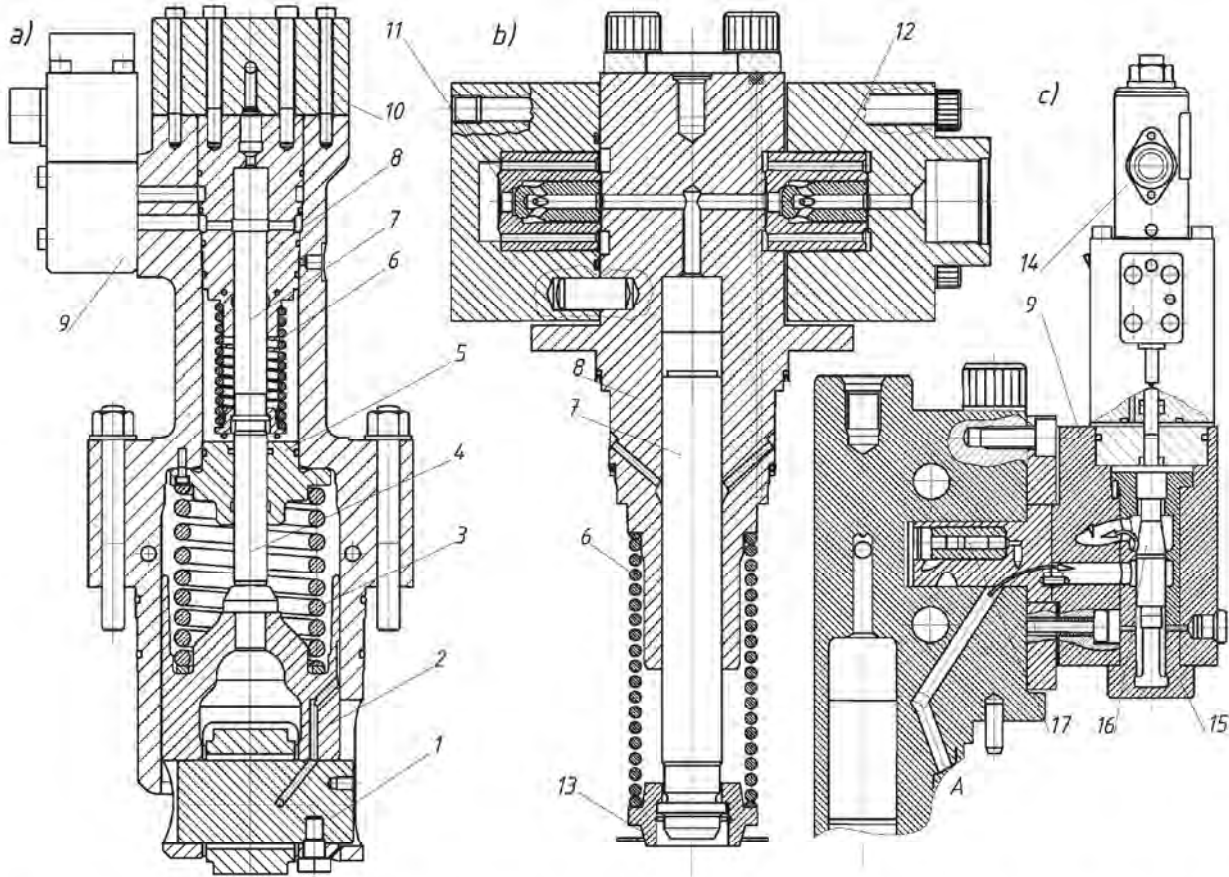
High pressure fuel pump of the 32 series engine from Wärtsilä (a), pump section of the fuel pump (b) and throttle valve for controlling the fuel supply of 46 series engines from Wärtsilä (c): 1 – roller pusher axis; 2 – pusher; 3 – pusher return spring; 4 – pusher rod; 5 – dividing diaphragm with pusher rod guide; 6 – plunger return spring; 7 – plunger; 8 – plunger bushing; 9 – flow control throttle valve; 10 – pump cover; 11 – suction valve; 12 – delivery valve; 13 – lower plate of the plunger return spring; 14 – throttle valve drive solenoid; 15 – throttle valve housing; 16 – throttling cone of the supply control valve; 17 – safety valve; A – low pressure fuel supply (adapted from [64, 65])
